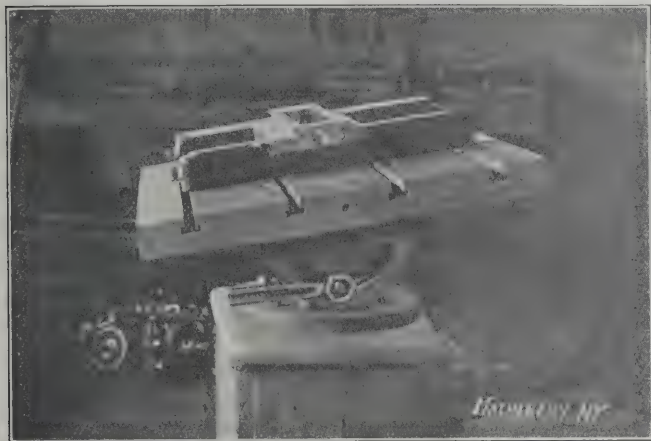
Adjustable Table for Holding Lathe Carriages or Other Parts while Scraping and Fitting
